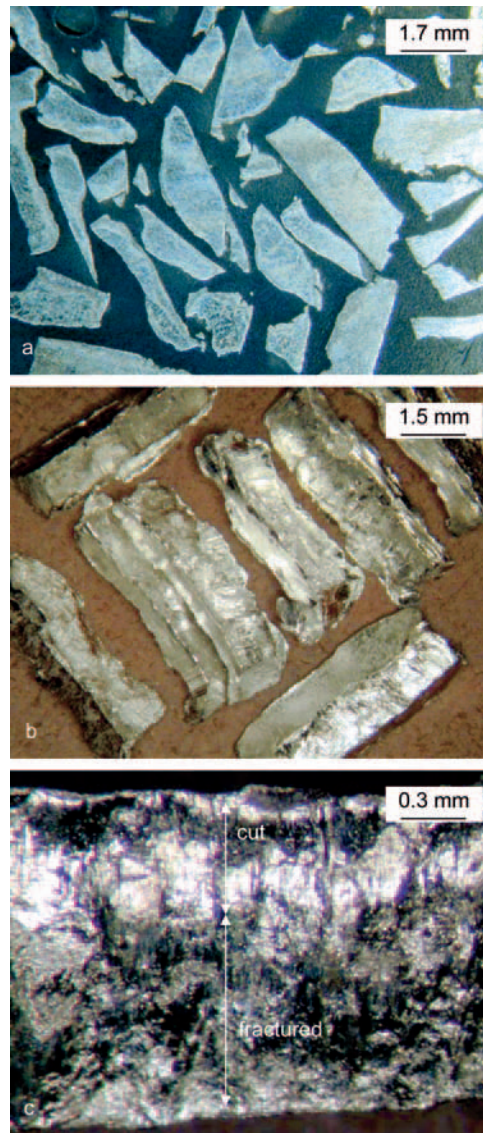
Morphological details of mechanically comminuted chips C2: a cross-sectional view; b top view showing surface deformation; c chip surface with regions formed by cutting and fracturing
